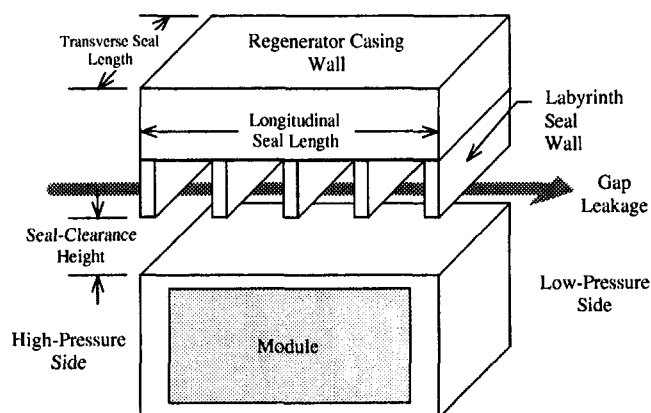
Diagram of seal along the module top and bottom faces for module-seal regenerator
